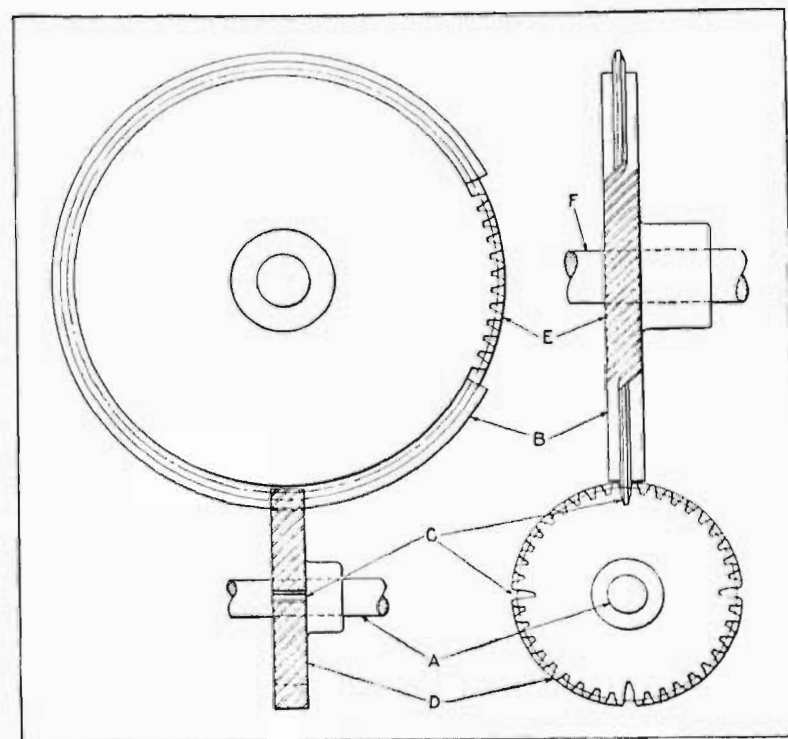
Modified Helical Gears Index Shaft *A* One-fourth of a Revolution During One Revolution of Driving Shaft *F*.
